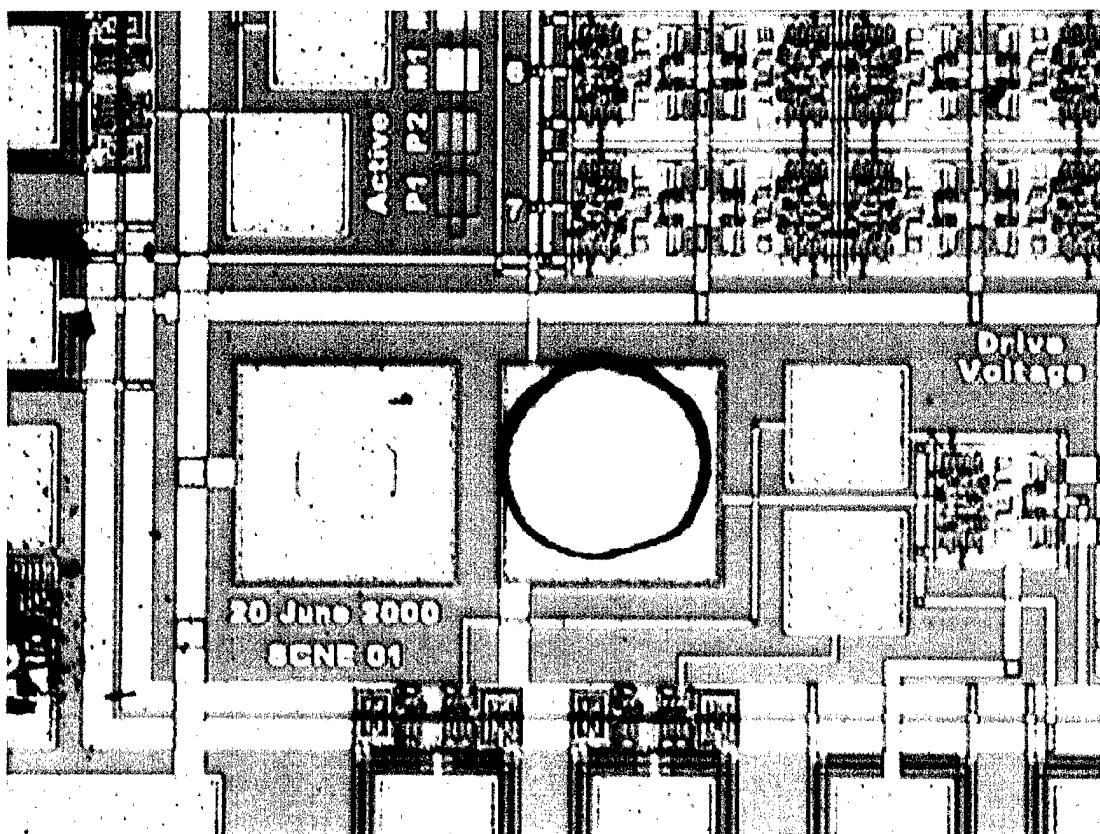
Photograph of attempted solder ball reflow on CMOS bond pads.
